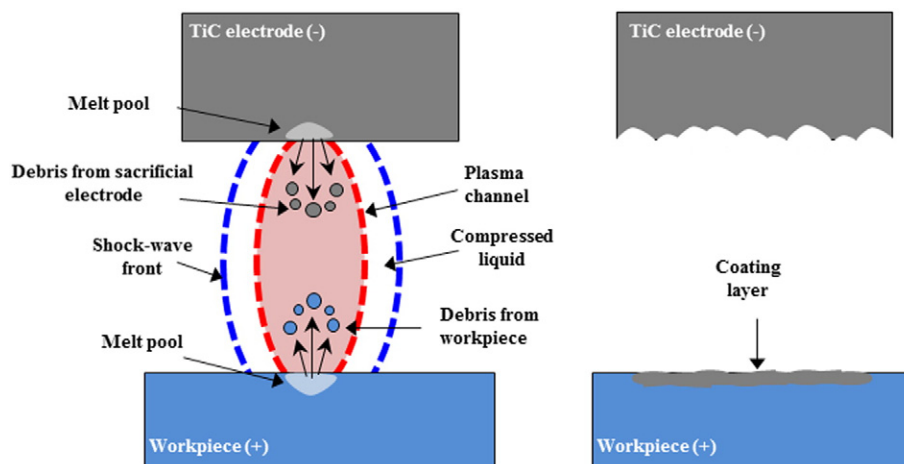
Schematic representation of the EDC mechanism: a) plasma channel formation; and b) workpiece surface modification/coating, following many sparking events.
